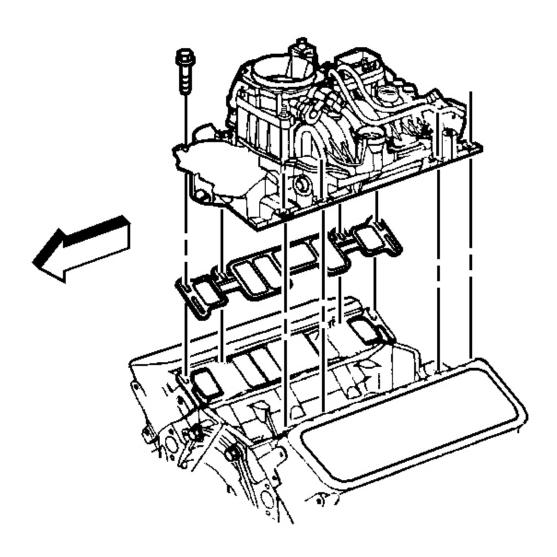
View Of Intake Manifold Assembly & Bolts Courtesy of GENERAL MOTORS CORP.
